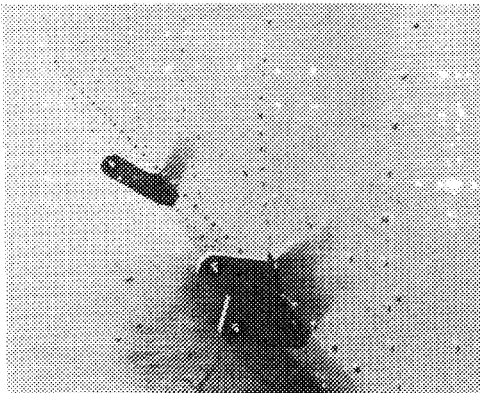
Wing-to-fuselage front and rear carrythrough attachments.
